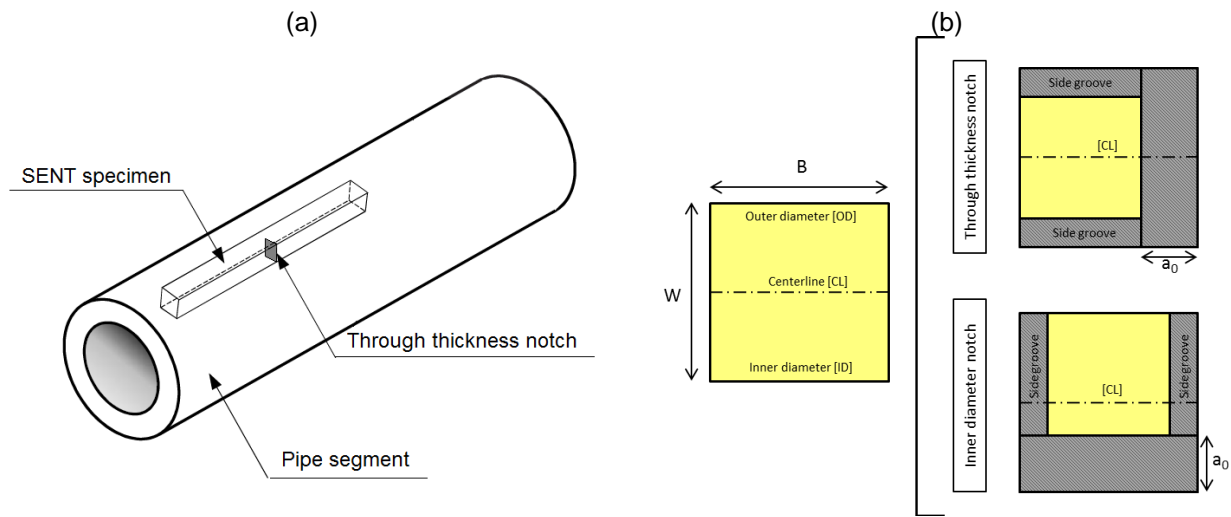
Specimen and TT notch orientation in pipe (a) and cross section configuration (b).
